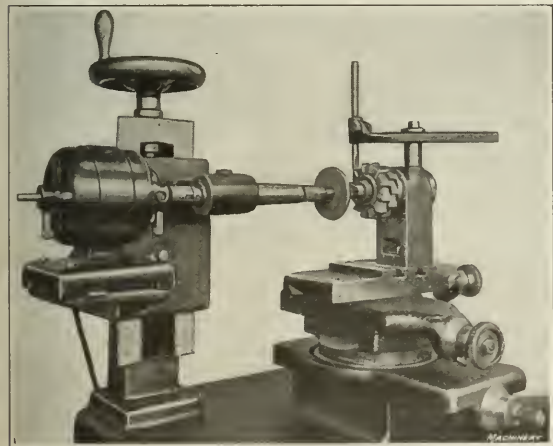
Close View of Wheel and Work on Machine shown in Fig. 1
